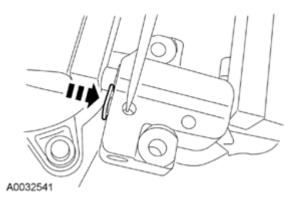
Pushing Ratchet Arm Back Into Tensioner Housing Courtesy of FORD MOTOR CO.
